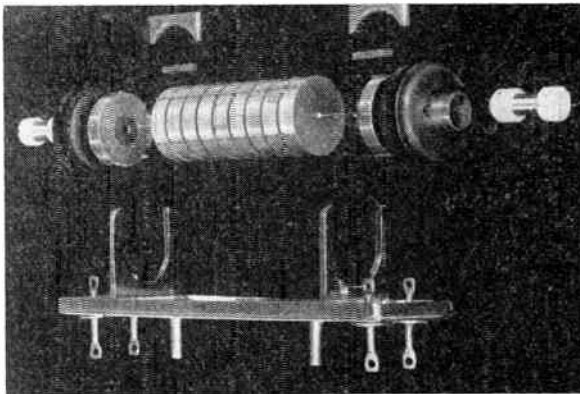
Exploded view of disk filter showing transducer wire, coil, and magnet.
